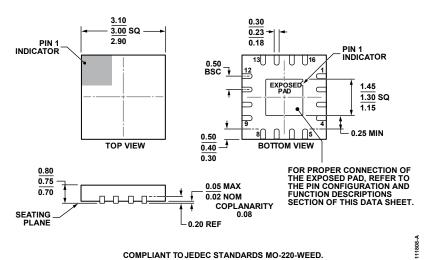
16-Lead Lead Frame Chip Scale Package [LFCSP] 3 mm × 3 mm Body and 0.75 mm Package Height (CP-16-21) Dimensions shown in millimeters
